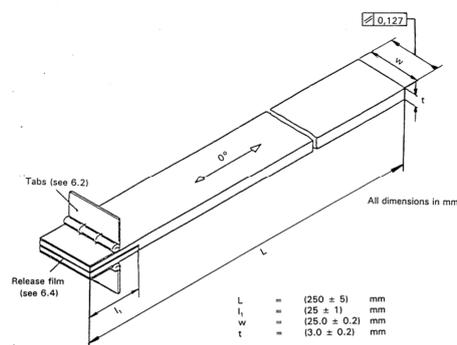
Schematic illustration of DCB specimens for G1c test
